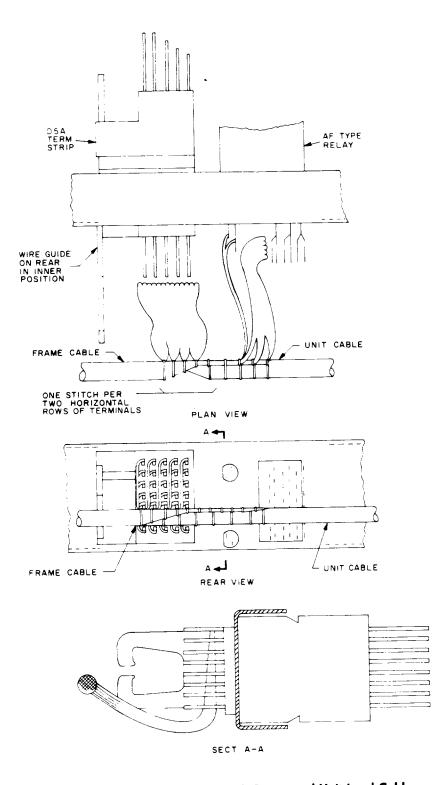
D-Type Terminal Strip With Frame and Unit Local Cables, Adjacent to Wire-Spring Relay
